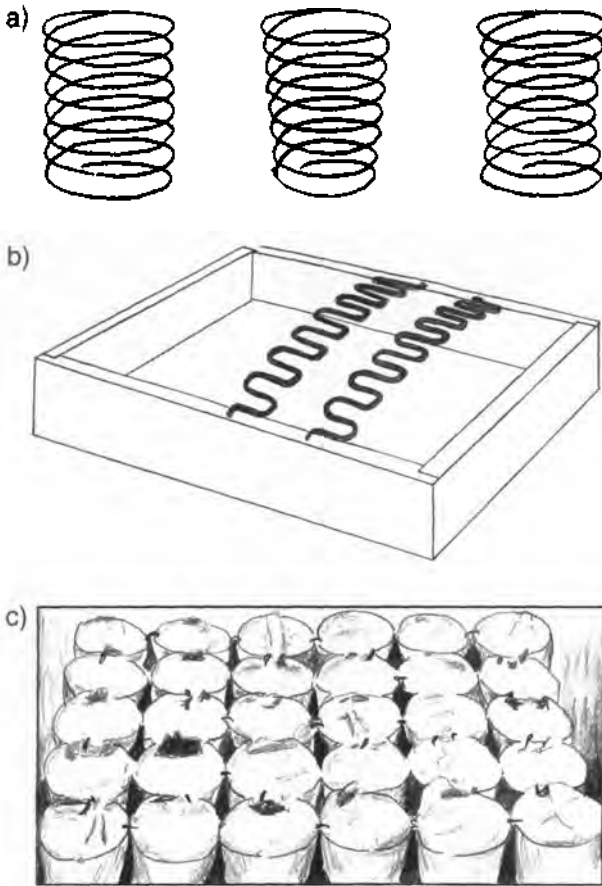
H2 Three types of upholstery springs: a) coil springs, of three different shapes, b) sinuous springs, being installed in a chair seat, c) marshall units, attached coil springs covered with burlap or other fabric as a subassembly.
